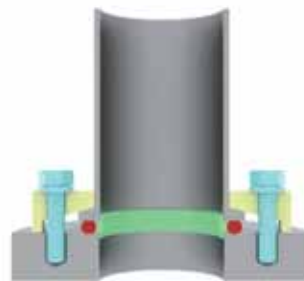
ISO-KF flange mounted on base plate with centering ring and claw clamps
